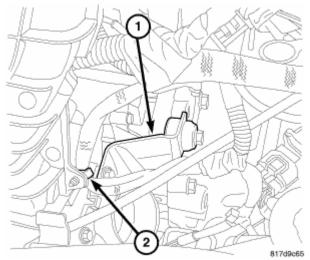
THROTTLE BODY SUPPORT Courtesy of CHRYSLER LLC
